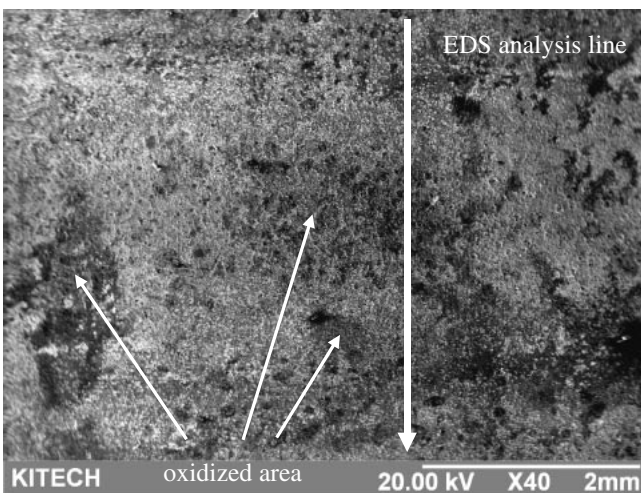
SEM images for bottom surface for TIG bead-on-plate welding of zinc-coated sheets.
